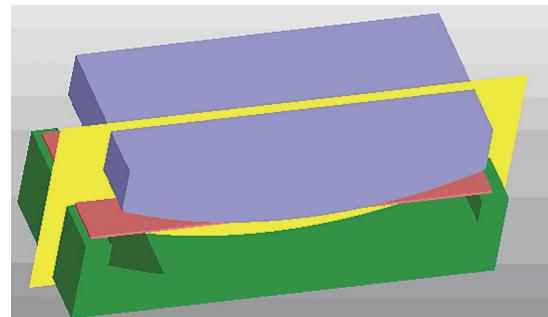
Tools and sheet workpiece set-up and cross-section for 2D FE analysis of springback
